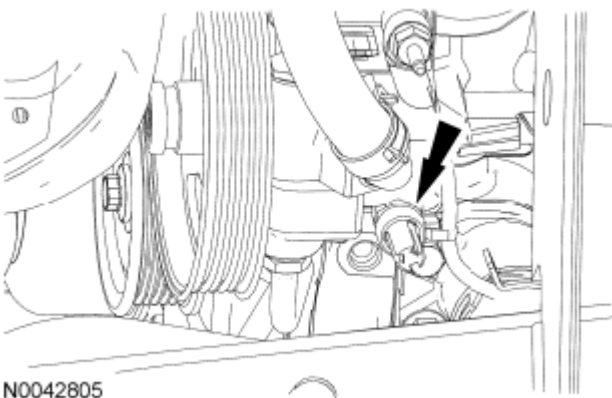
Identifying Wiring Harness Retainer And Power Steering Pump Stud Bolt
